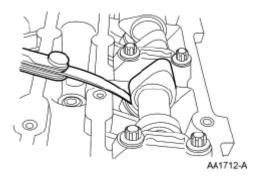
Measuring Valve Clearance Using Feeler Gauge Courtesy of FORD MOTOR CO.
